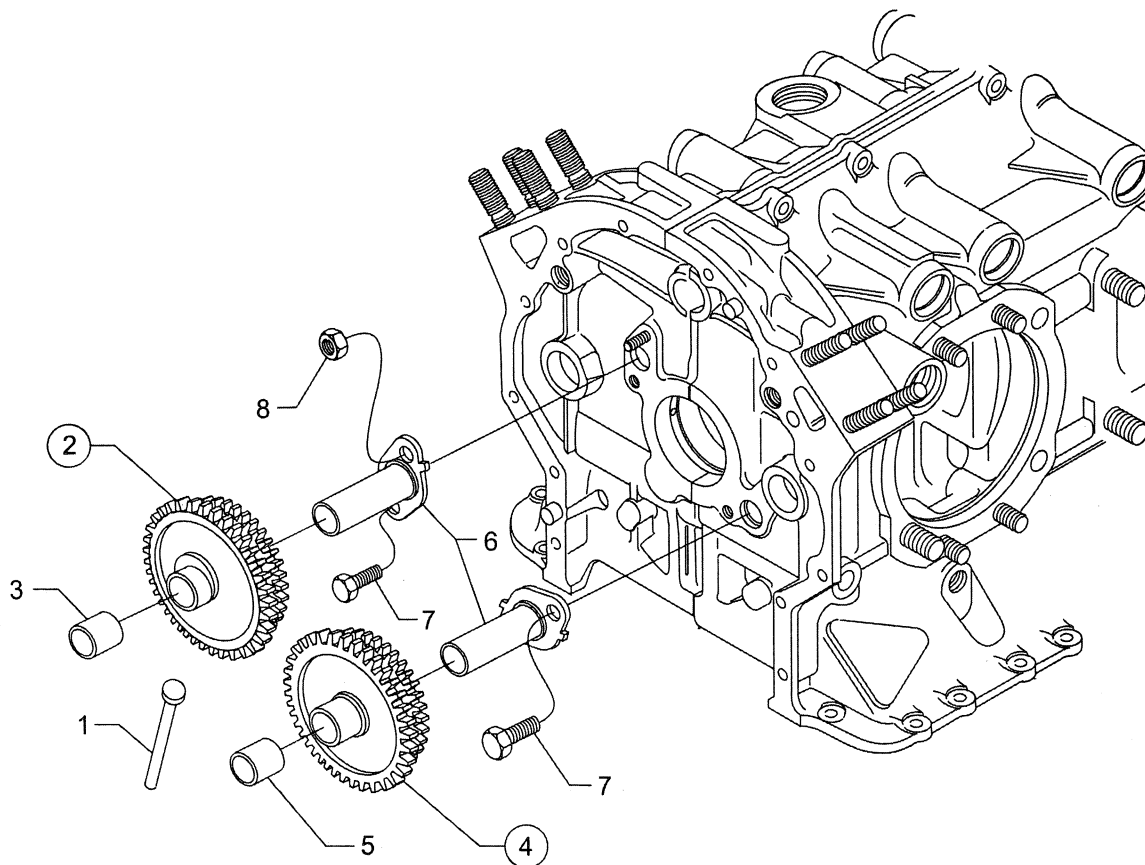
CRANKSHAFT AND FUEL PUMP IDLER GEARS
